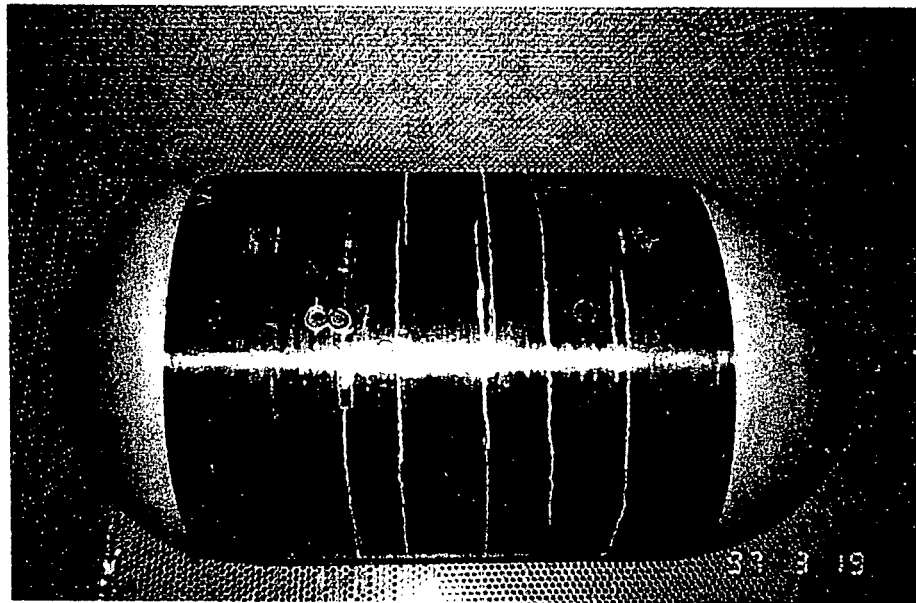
Tank 013 in the Fatigue Test Chamber, 0° View
